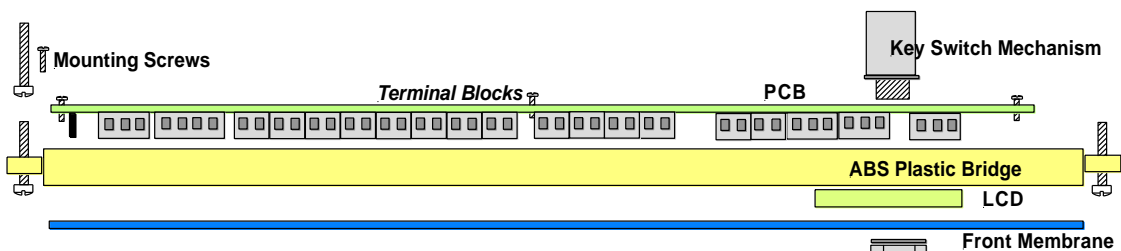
Exploded Top View of Membrane, Bridge and PCB
